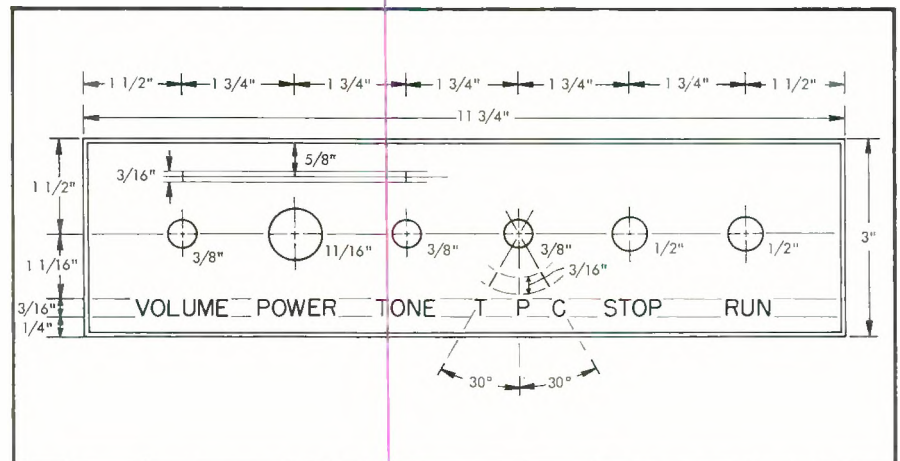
Lettering and dial calibration marks were engraved in the 1/16-in. thick black-anodized aluminum panel.
